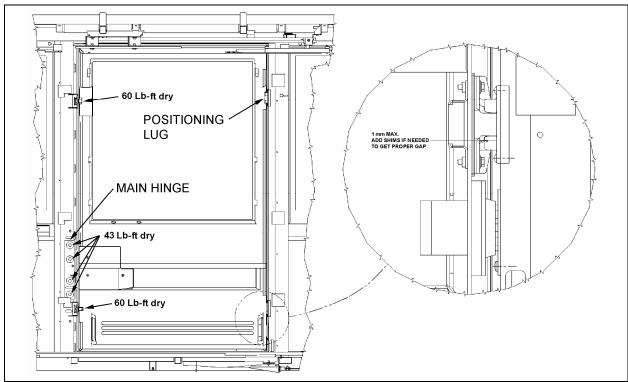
WCL SLIDING DOOR INSTALLATION
